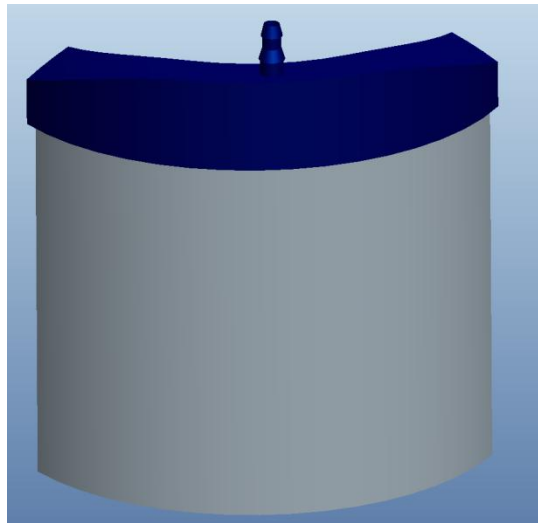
Pro-Engineer model showing the oxygenator module designed for testing the manufacturing method with the gas inlet attached highlighted in blue.
